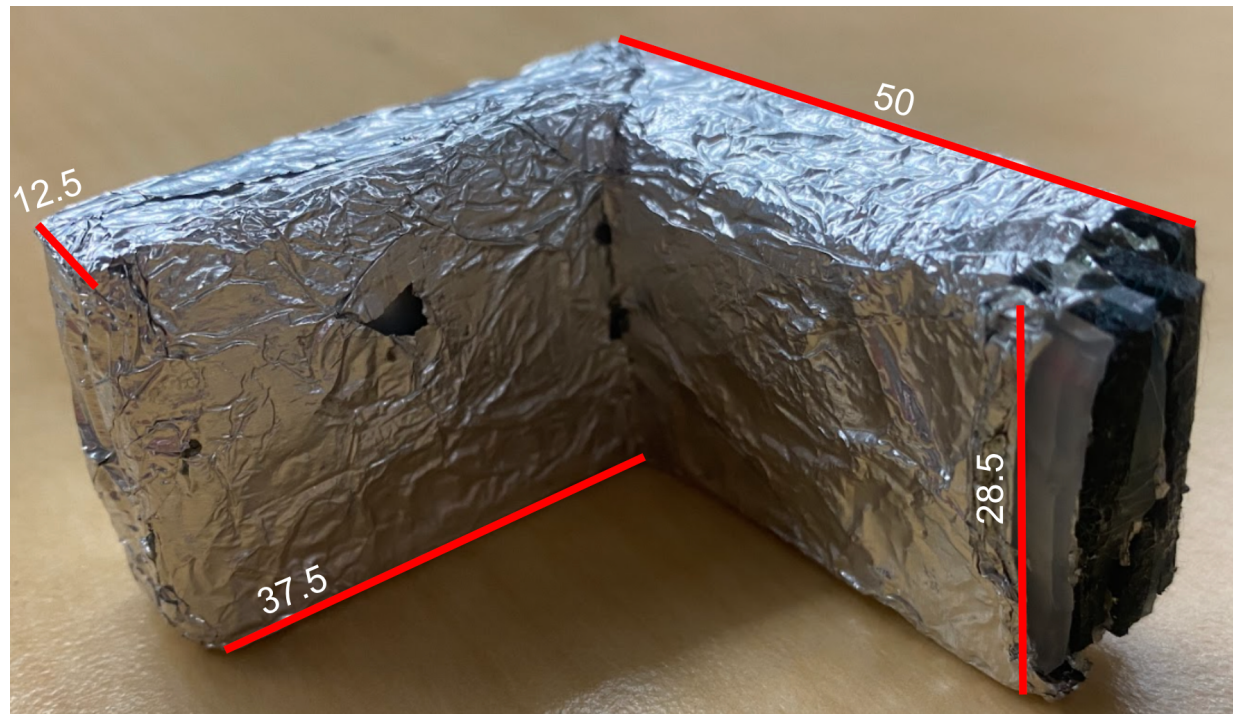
A trimetric view of one of the corner dampers with one section of the foil exterior removed. Dimensions are in mm.
